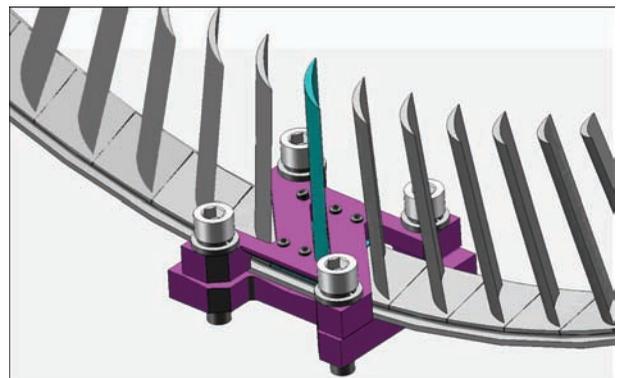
Model of assembly-welding fixture for EBW of cantilever donor-blade with guide case semi-ring
